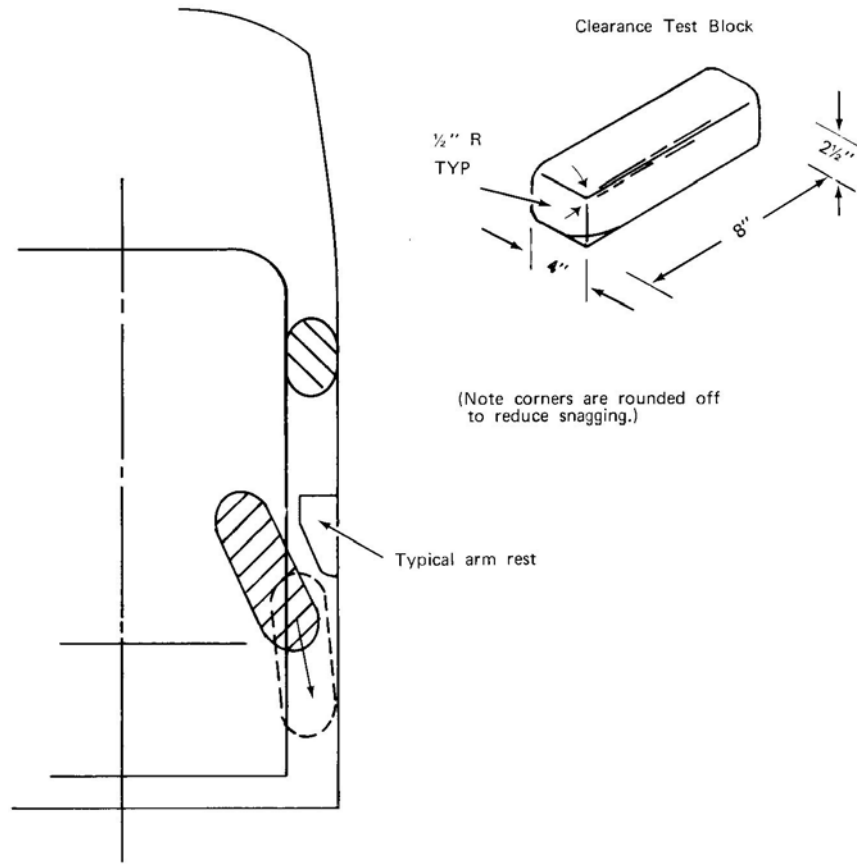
USE OF CLEARANCE TEST BLOCK TO DETERMINE HAND/ARM ACCESS
